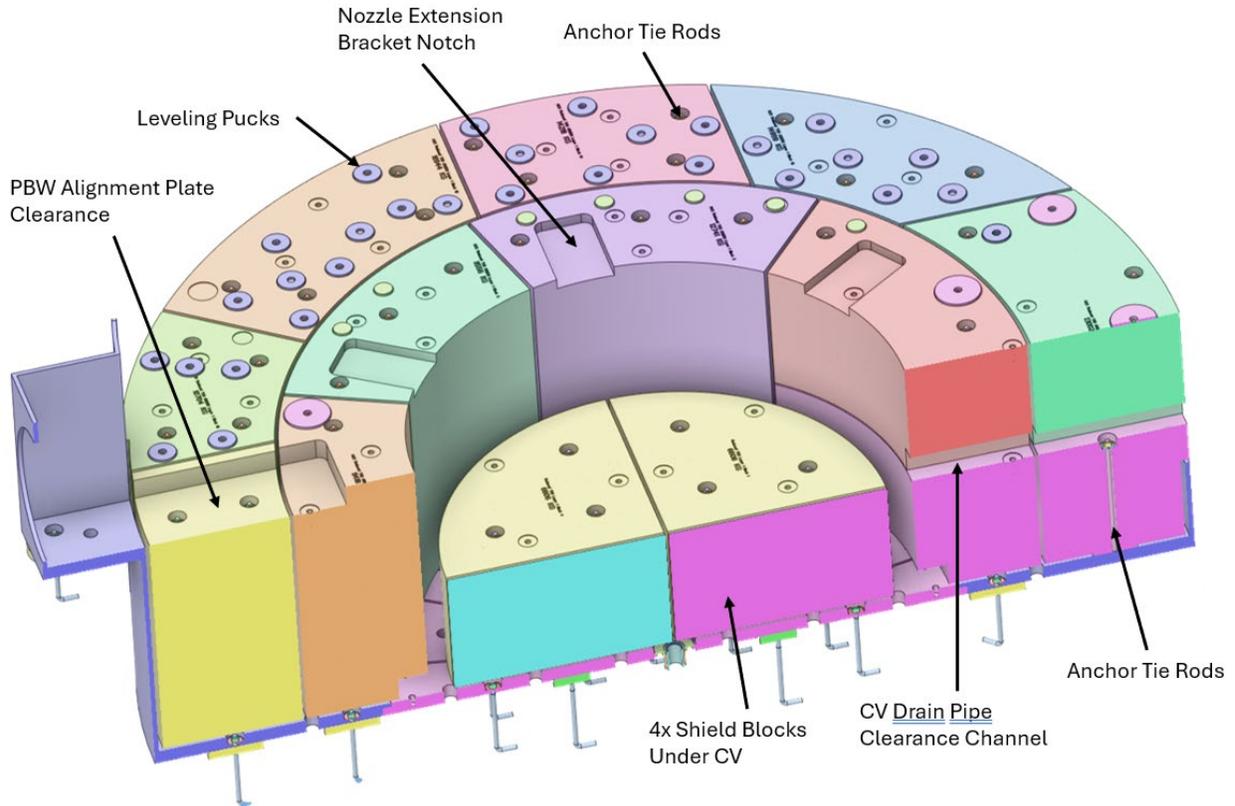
Cross section view of bulk shielding layer 1 including mounting hardware
